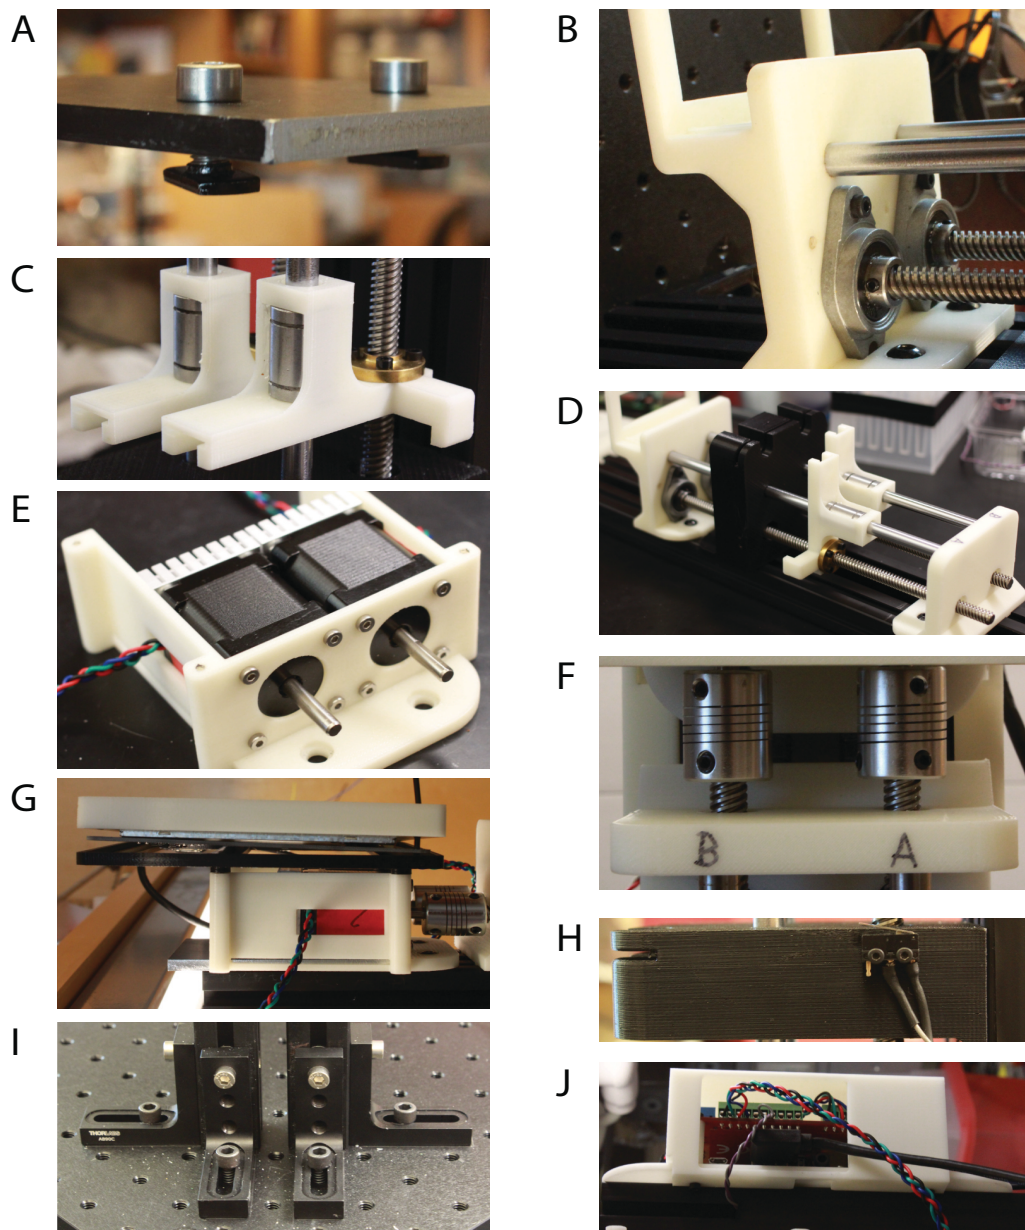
Images of key PDSP assembly steps as described in 5.4 Hardware Assembly
